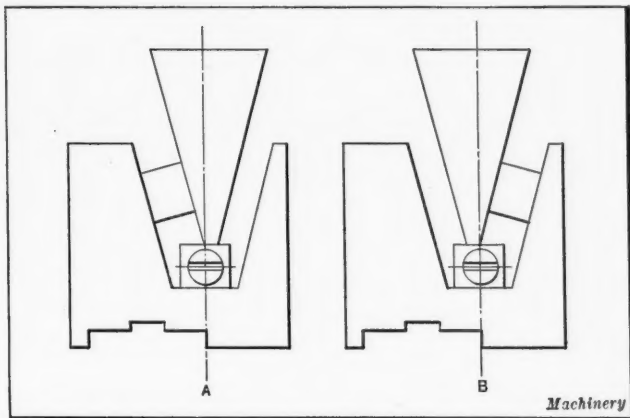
Diagram showing Method of setting Tools on Bilgram Generator
